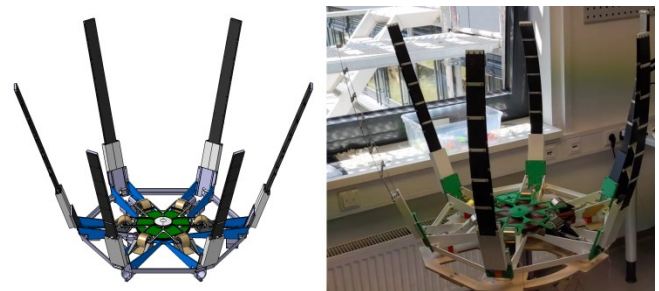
Left: Isometric projection of gripping system in CAD; Right: First assembled prototype.
